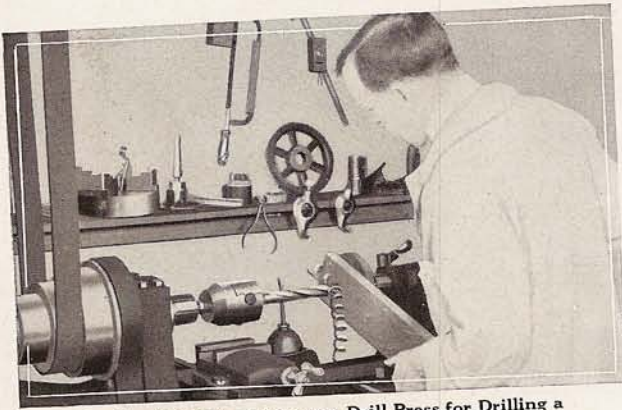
Using the Lathe as a Drill Press for Drilling a Hole in a Flat Piece of Work.
